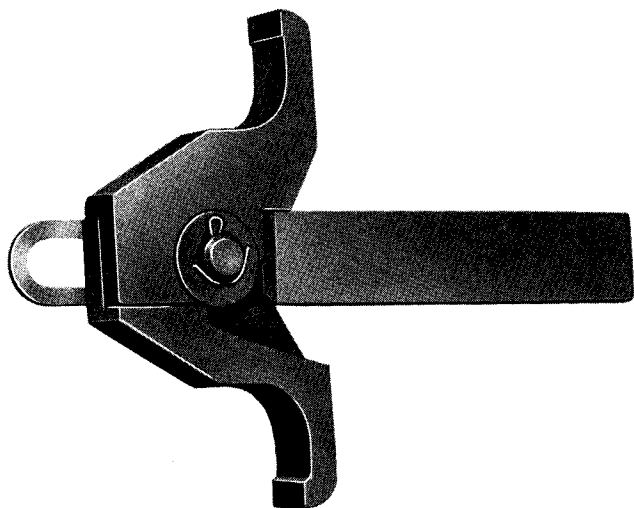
B Bearing Remover, Cat. No. 317648 wings spread for removing the bearing
